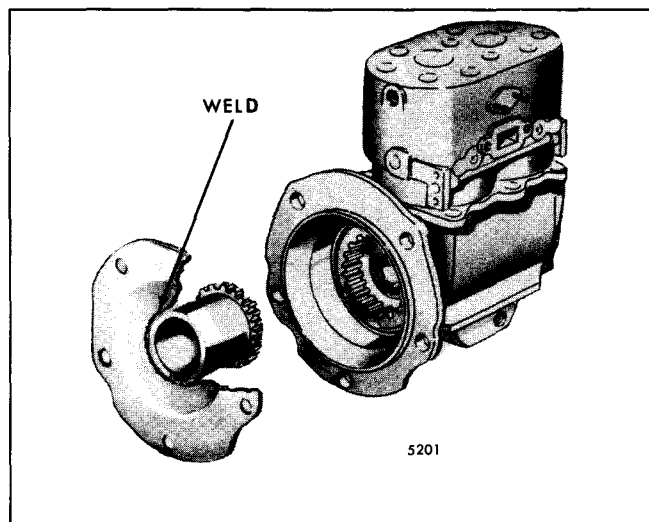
Fixture for Holding Drive While Installing or Removing Slotted Nut
